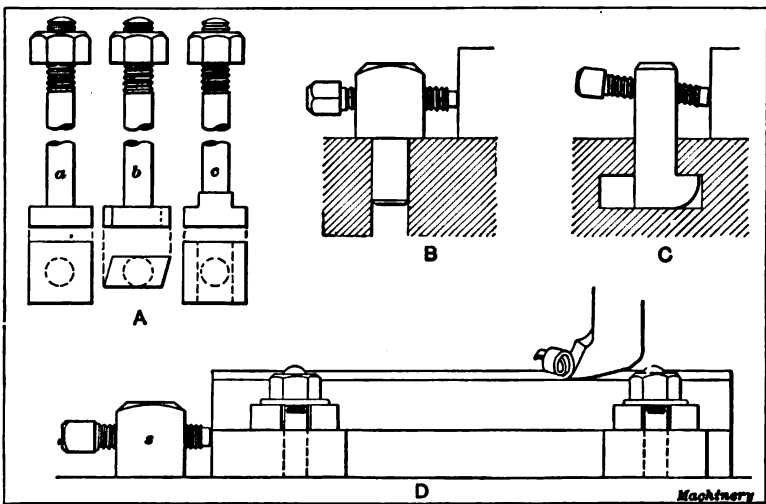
Planer Clamping Bolts—Stop-pins—Use of Stop-pins
